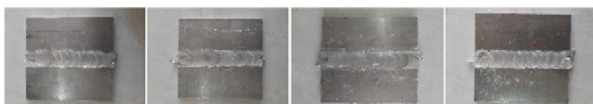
Welding samples from right to left at speeds of 1180, 1500, 950 and 750 rpm, respectively
